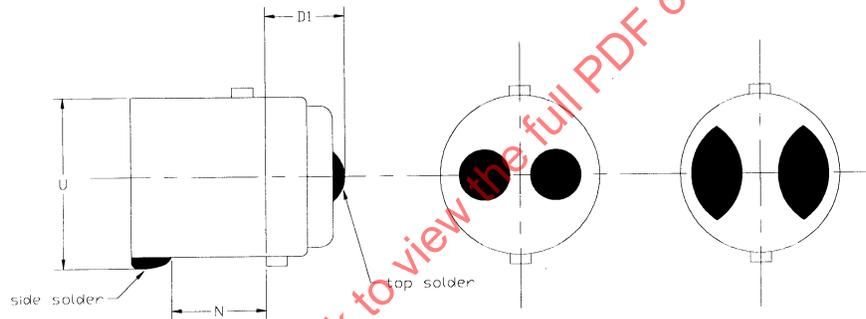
C—BAY15d DIMENSIONS TO BE CONTROLLED ON A FINISHED BULB
